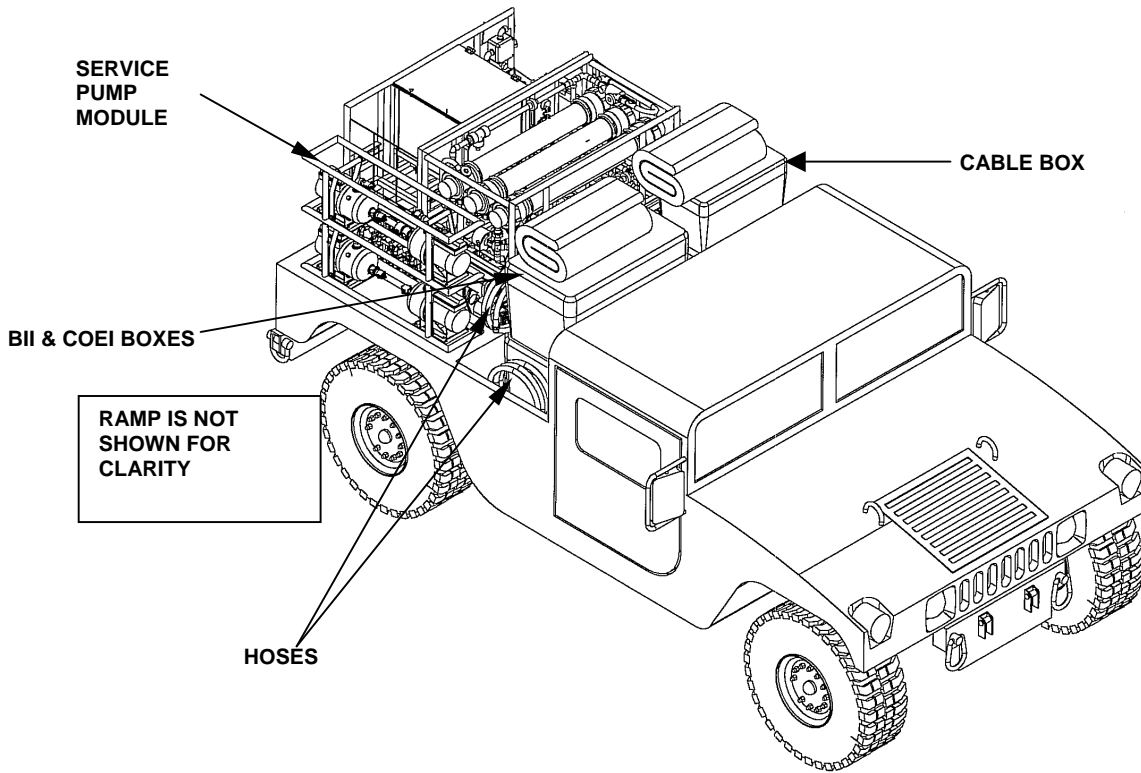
Offloading Lightweight Water Purifier Hoses and Tanks.
